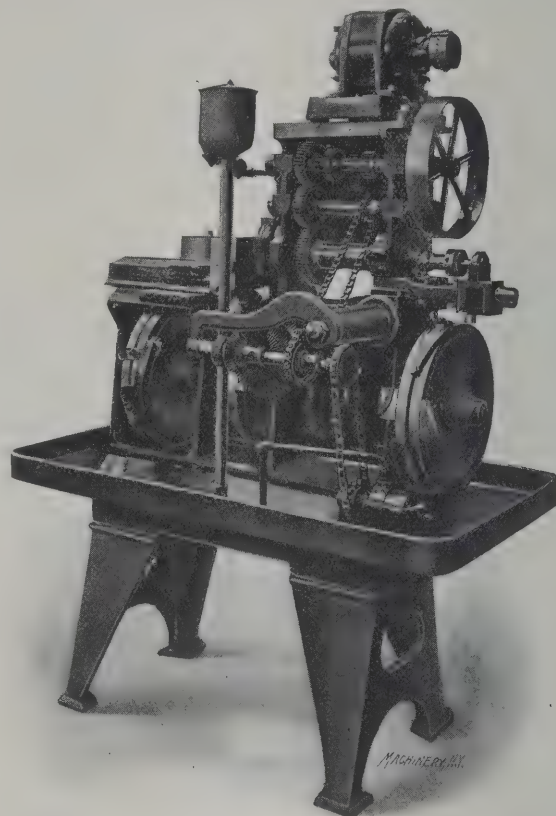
Rear View of Wells Automatic Screw Machine, showing Driving Mechanism
